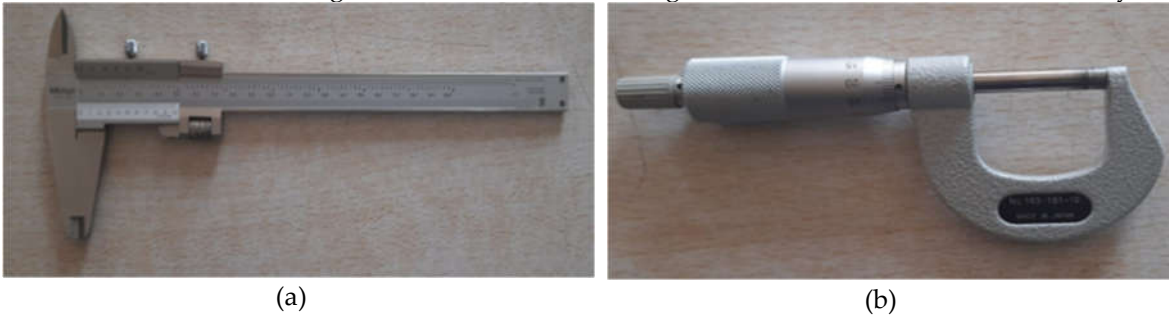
(a)Vernier caliper and (b)Micrometer screw gauge.
